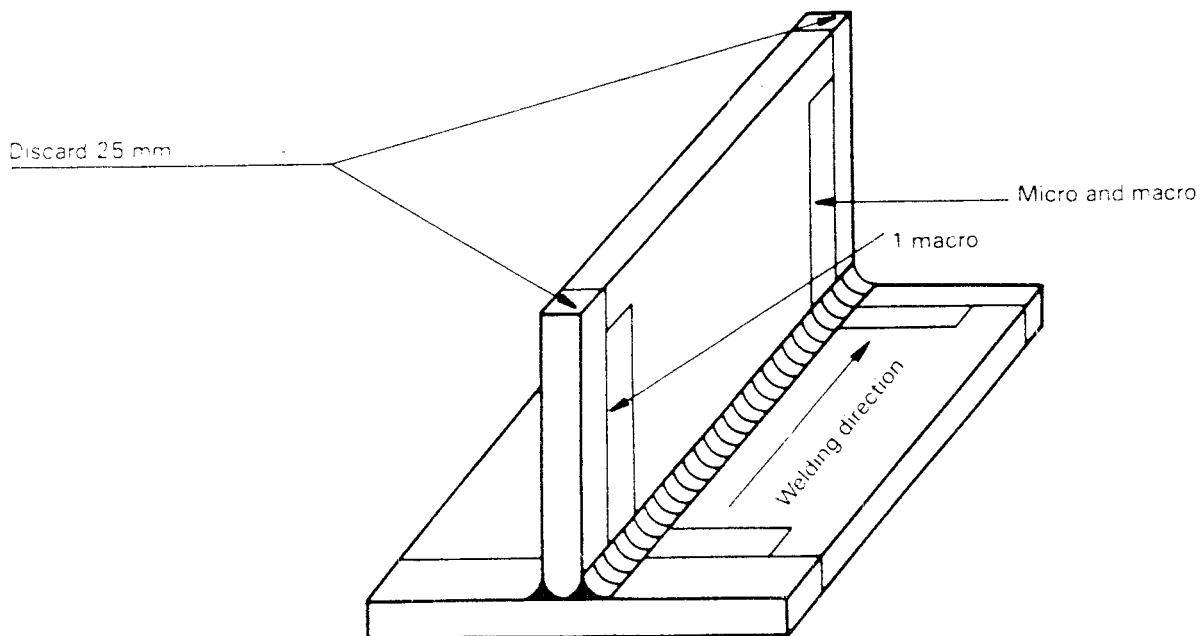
Location of test specimens for a fillet weld on plate
